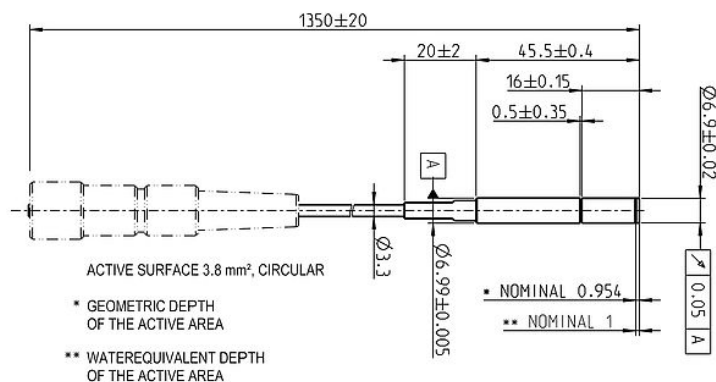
Technical drawing of Type No. PTW-60019 microDiamond detector. Dimensions are given in mm [59].
